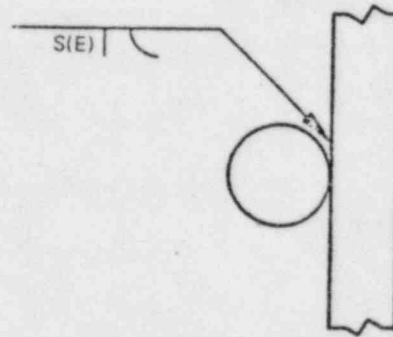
Application of flare-bevel- and flare-V-groove weld symbols
